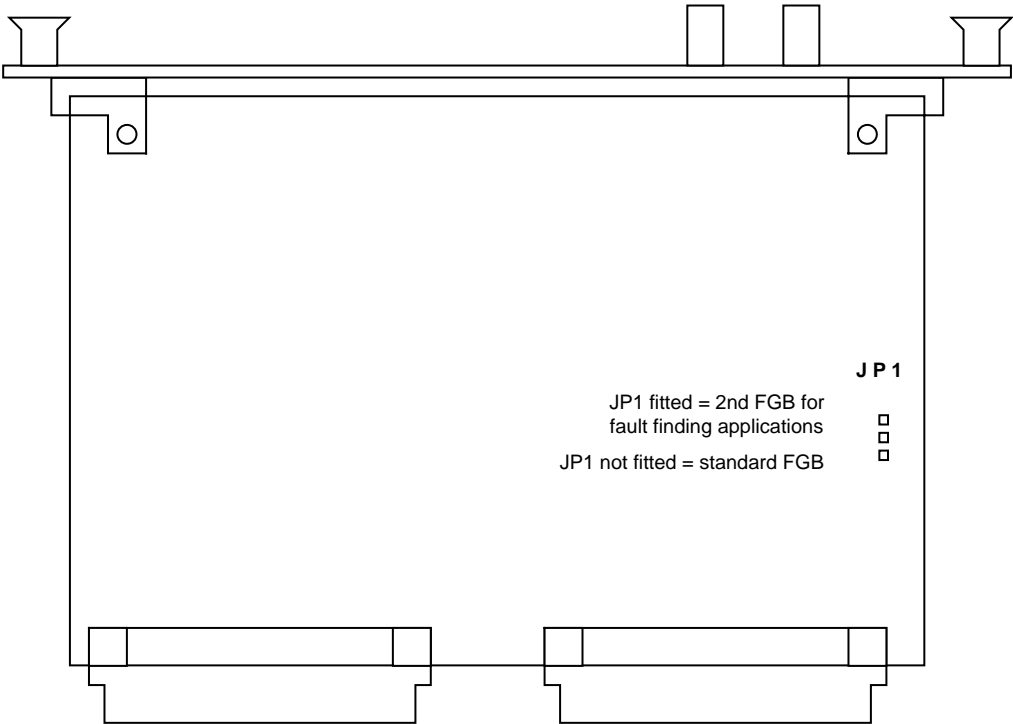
Jumper location: Oscillator/Counter Board (Oscillator/Counter Board).
